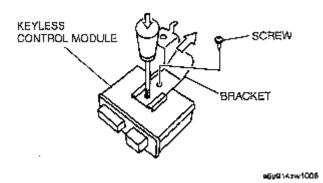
Removing Bracket & Screw Courtesy of MAZDA MOTORS CORP.
